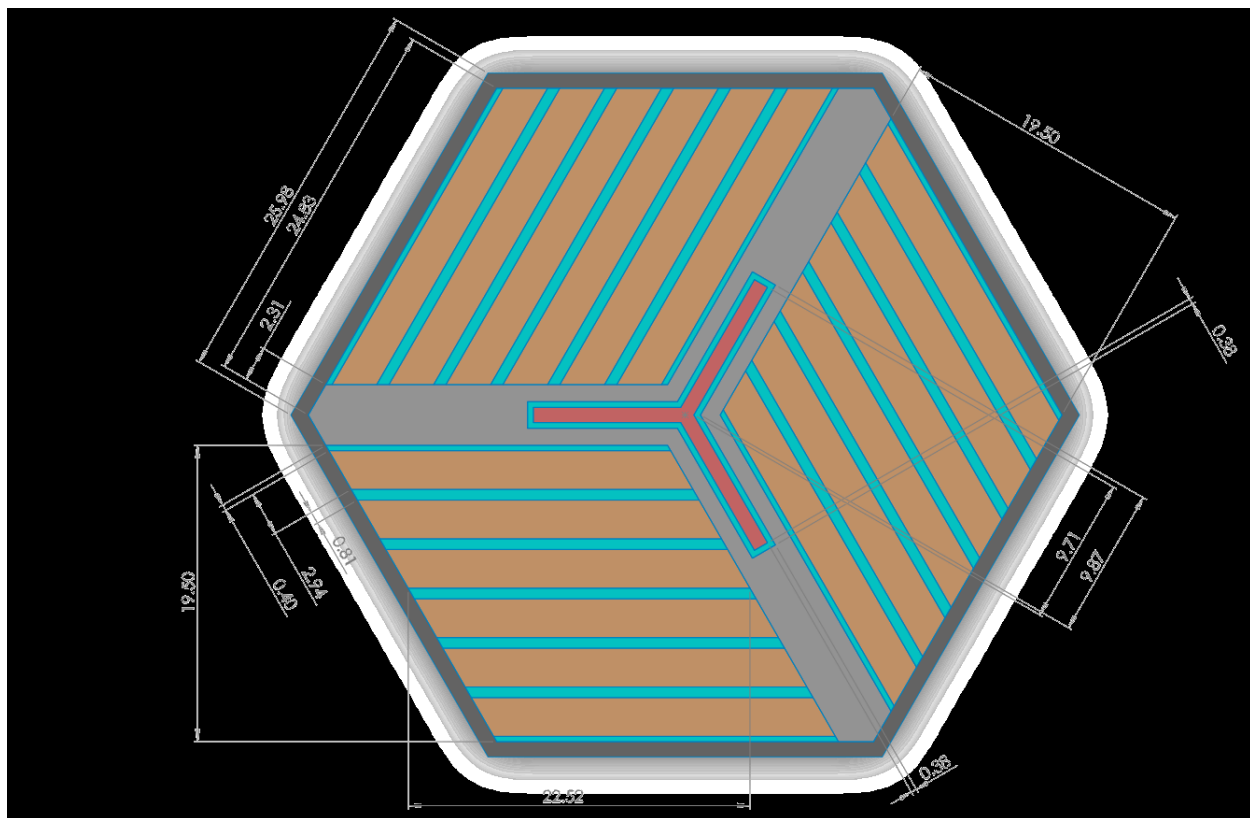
AHTR fuel assembly derived dimensions. (Varma, et al., 2012)
